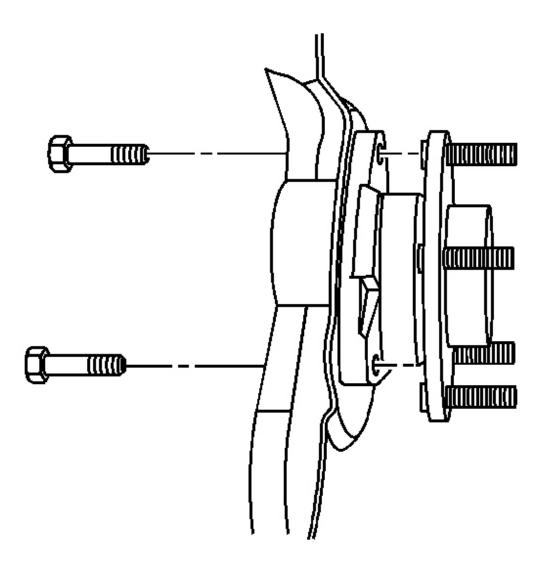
View Of Wheel Hub And Bearing Mounting Bolts (RWD) Courtesy of GENERAL MOTORS CORP.
